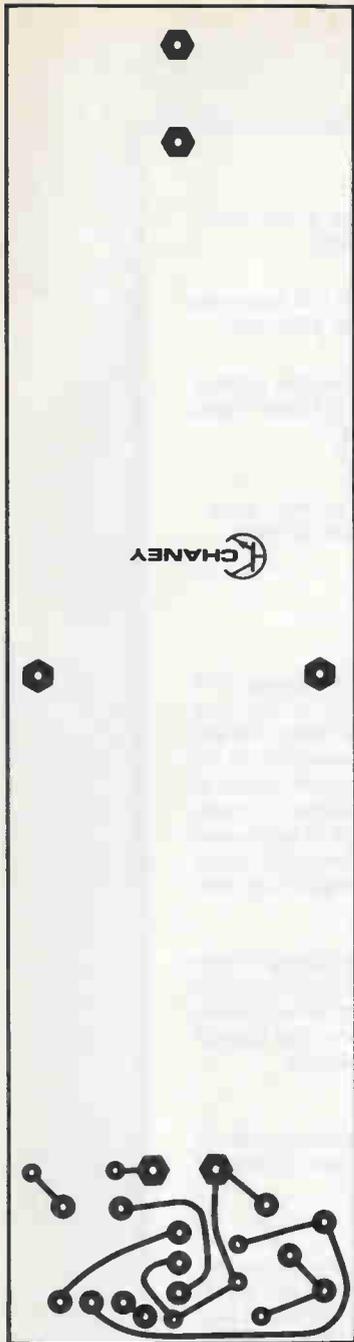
Foil Pattern of PC Board. This is a full-sized pattern for the Black Light
